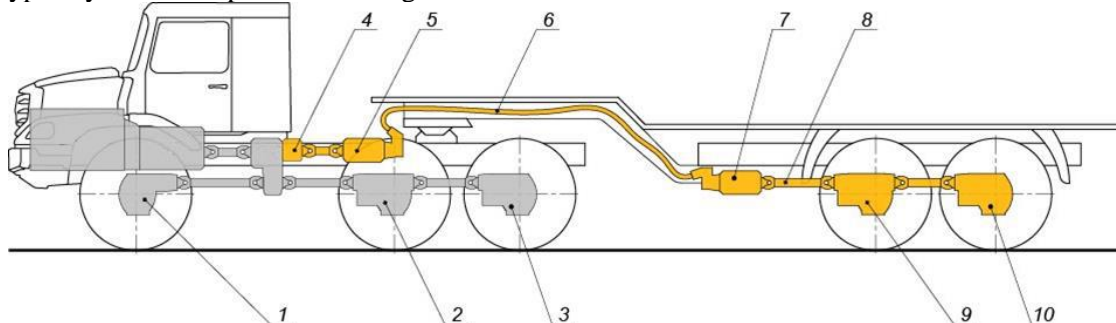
layout of units of the hydrostatic drive of the semi-trailer of the "hydraulic shaft" type: 1, 2, 3 - leading axles of the tractor; 4 - power take-off box; 5 - pump; 6 - flexible hoses; 7 - hydraulic motor; 8 - semi-trailer drive shaft; 9, 10 - leading axles of the semi-trailer.
